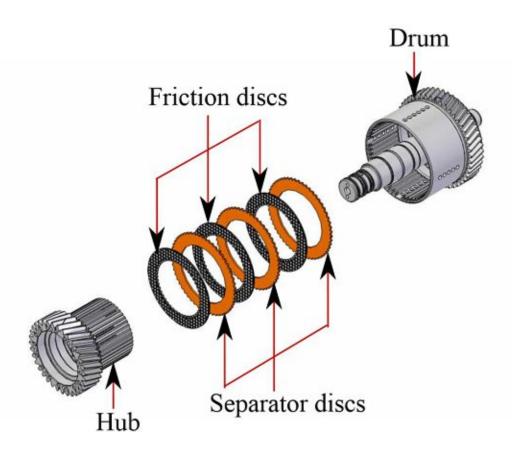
The clutch assembly for an automatic transmission exploded view.<sup>161</sup>
